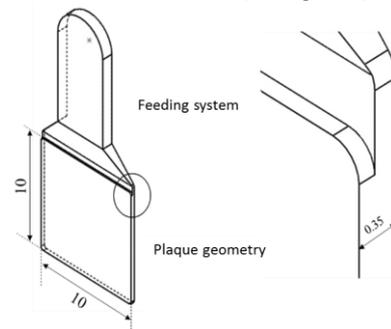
Thin-walled plaque geometry (all dimensions are in mm).
